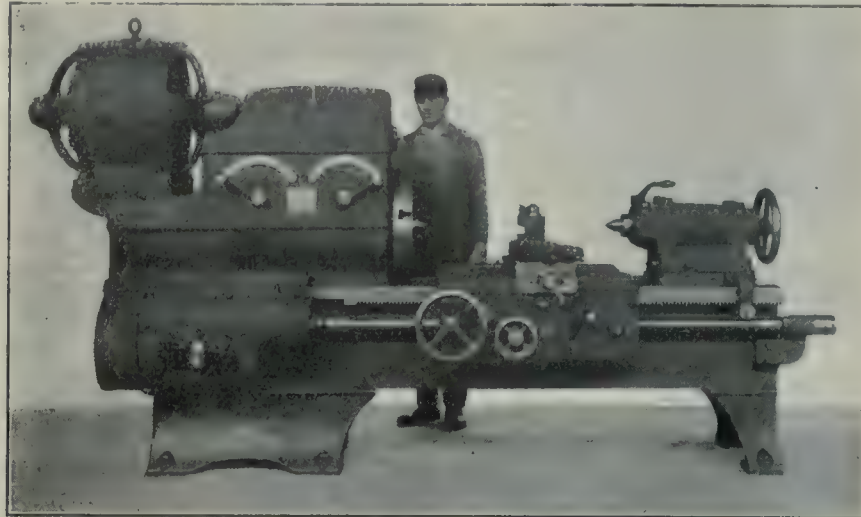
HEAVY DUTY PROJECTILE TURNING LATHE.
